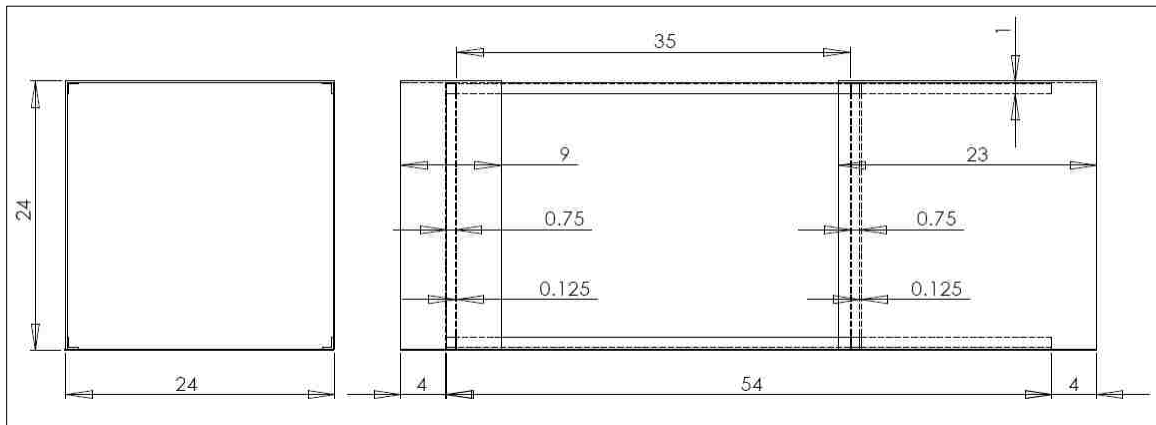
Schematic Drawing of Plug 1 (in inches) [1]
